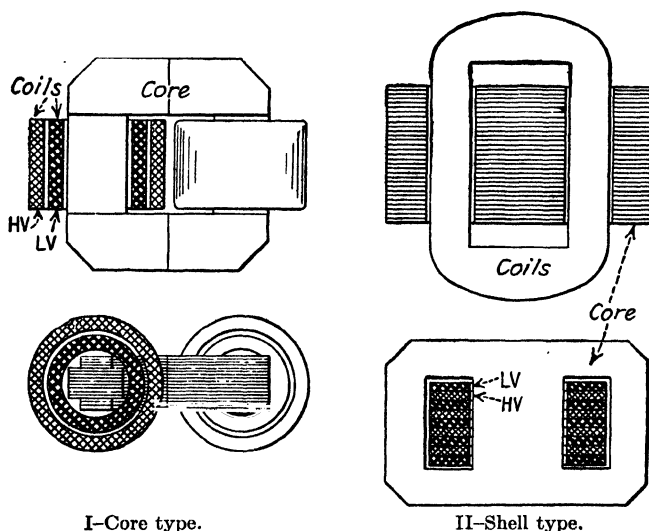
Illustrating core-type and shell-type transformer construction.
